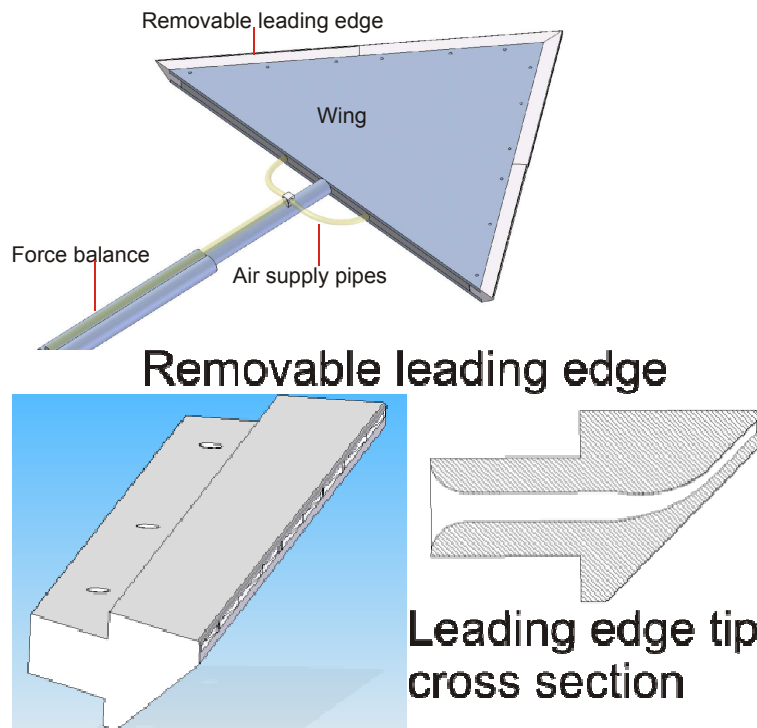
Full wing leading edge blowing tips, manufactured using rapid prototyping.
